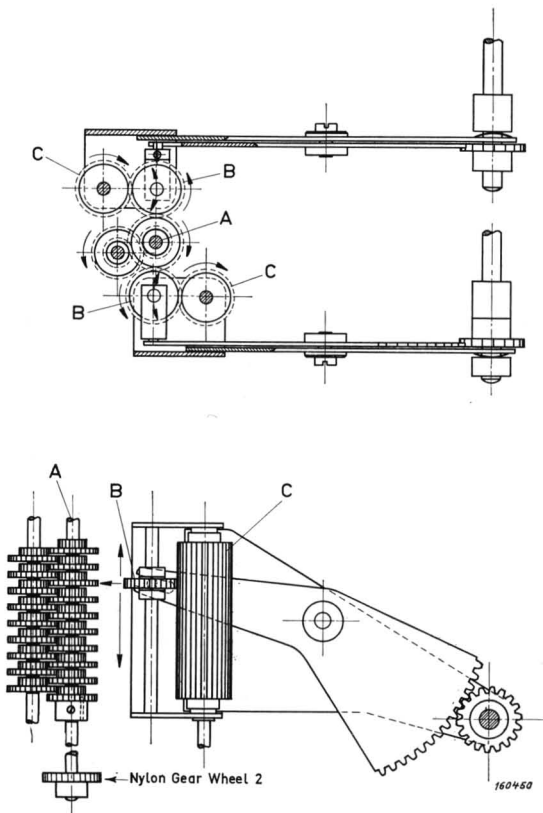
Gear-box and shifting arrangement for Paper Speed and Drive Shaft Speed.
